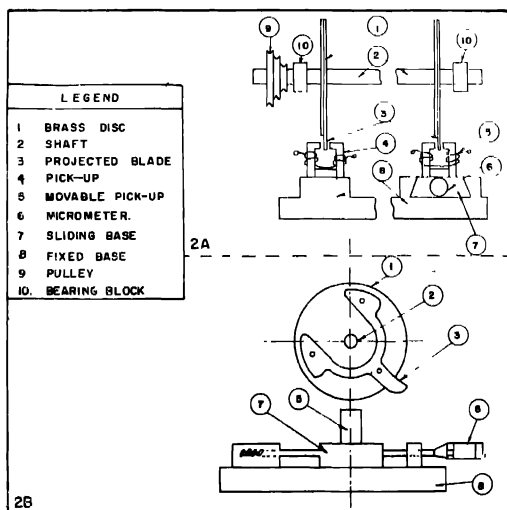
High speed shaft/unit with pick up devices. (A) Mechanical set-up, (B) projected blade and micrometer arrangement.
